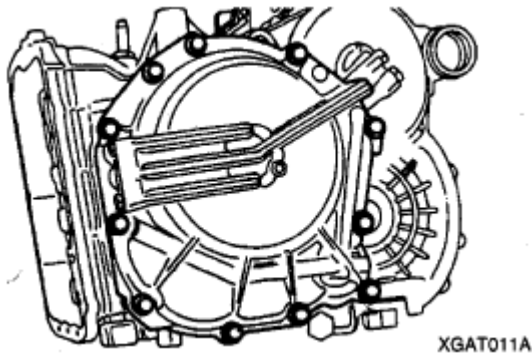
Identifying Lower Separating Plate And Lower Valve Body
